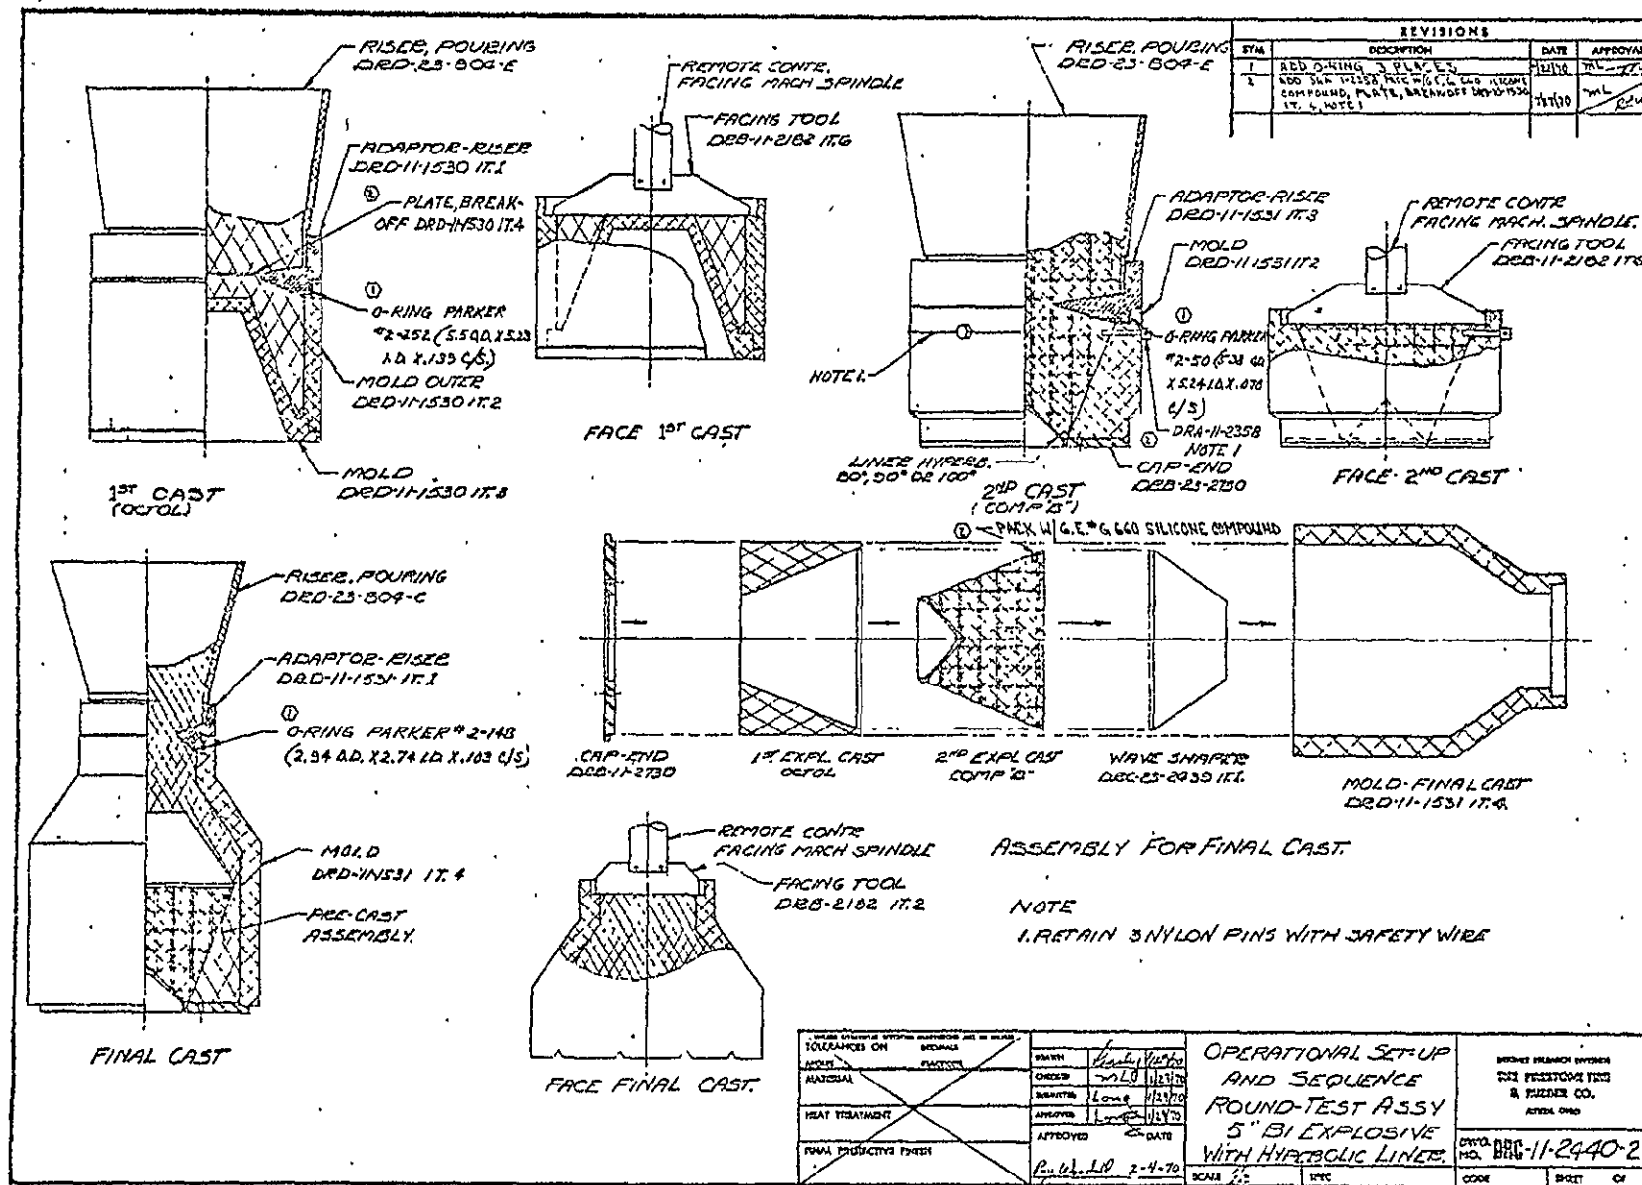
Bi-explosive charge test assembly, 5-in. dia.
